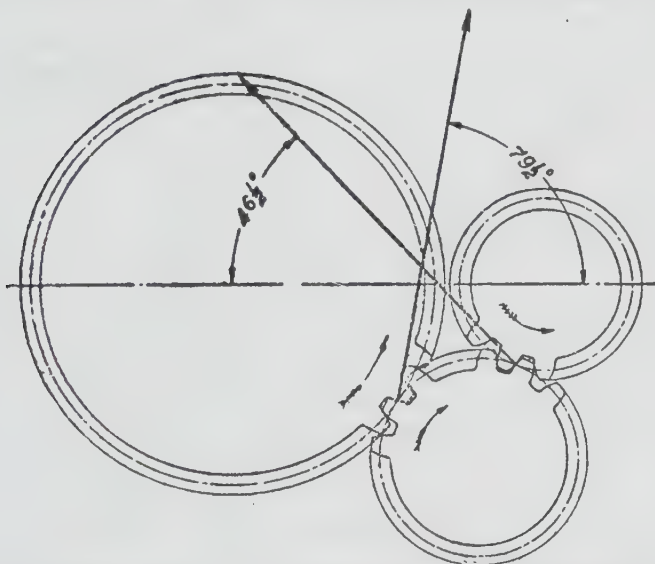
MAGNITUDE AND DIRECTION OF TOOTH PRESSURE ON REVERSE GEARS.
